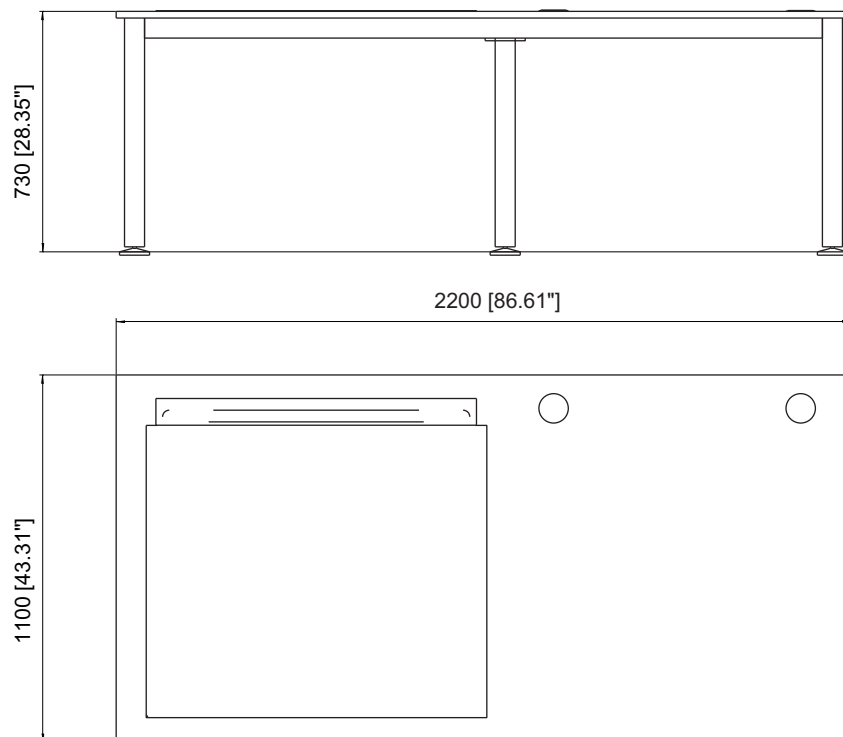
Side and top view of the workstation (Dimensions not specified are given in mm.)
